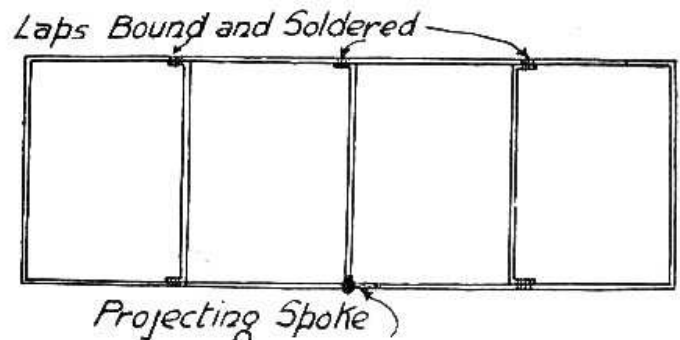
The elevator is made from 20-gauge piano wire bent and soldered to this shape.
